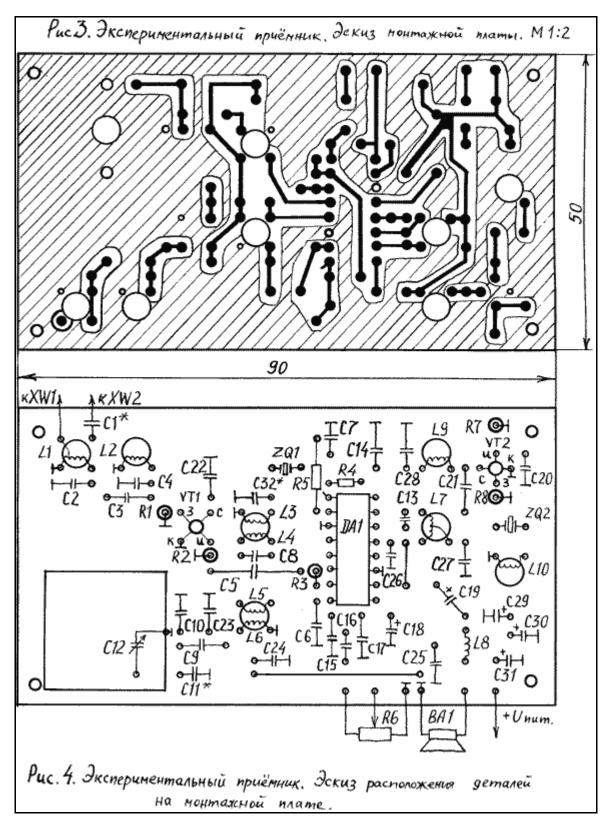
represents the PC board bottom side. Figure 4 is the parts layout.
